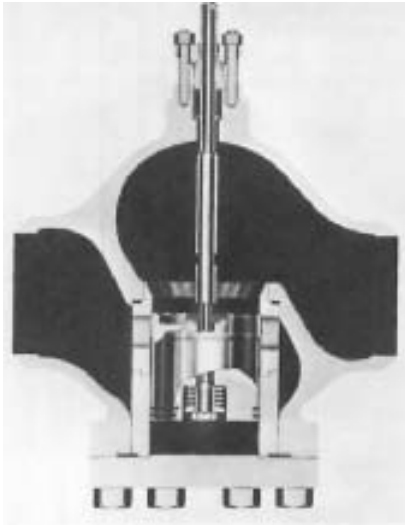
Cage valve with bottom access (Copes-Vulcan)
